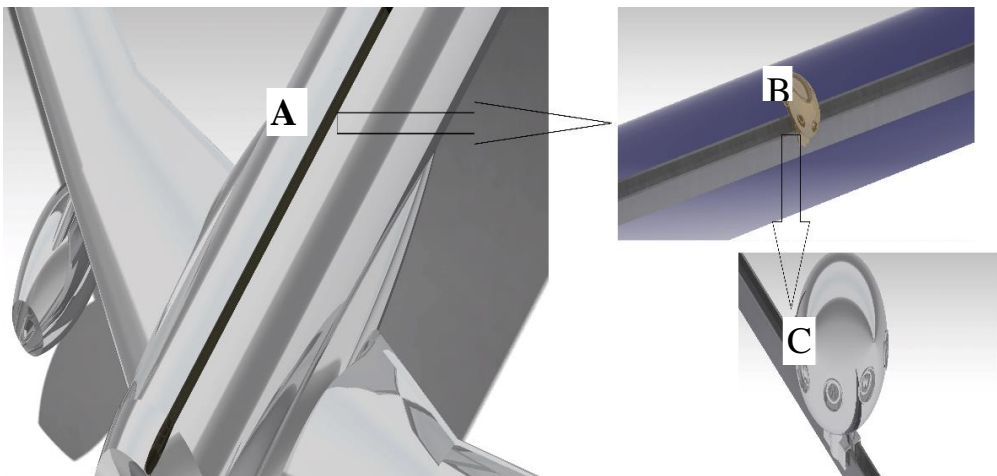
(The main camera-assembly inside the glass tube, A: Aerodynamically design Glass tube section on upper part of fuselage Section, B: detailed view of glass tube section and camera-platform assembly inside the Section, C: camera mounted on platform assembly)
